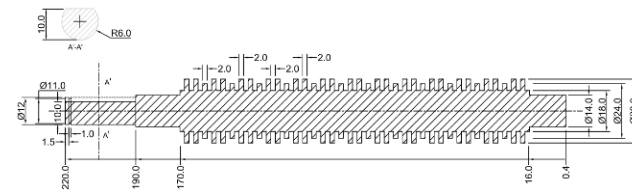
Sectional view of the 2 mm flat noodles cutting shaft
